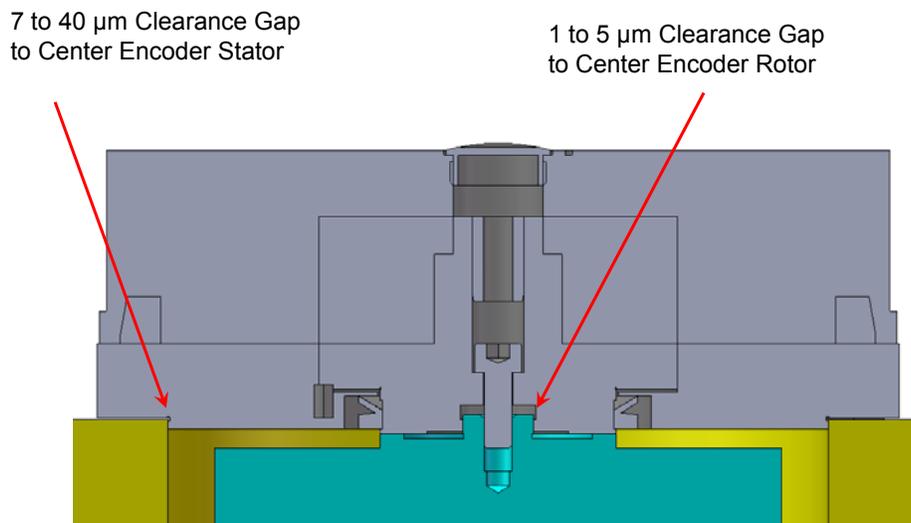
Section-view showing the fits used for centering the RON905 encoder
